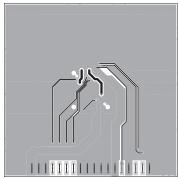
SKY65329-NP Evaluation Board Assembly Drawing
